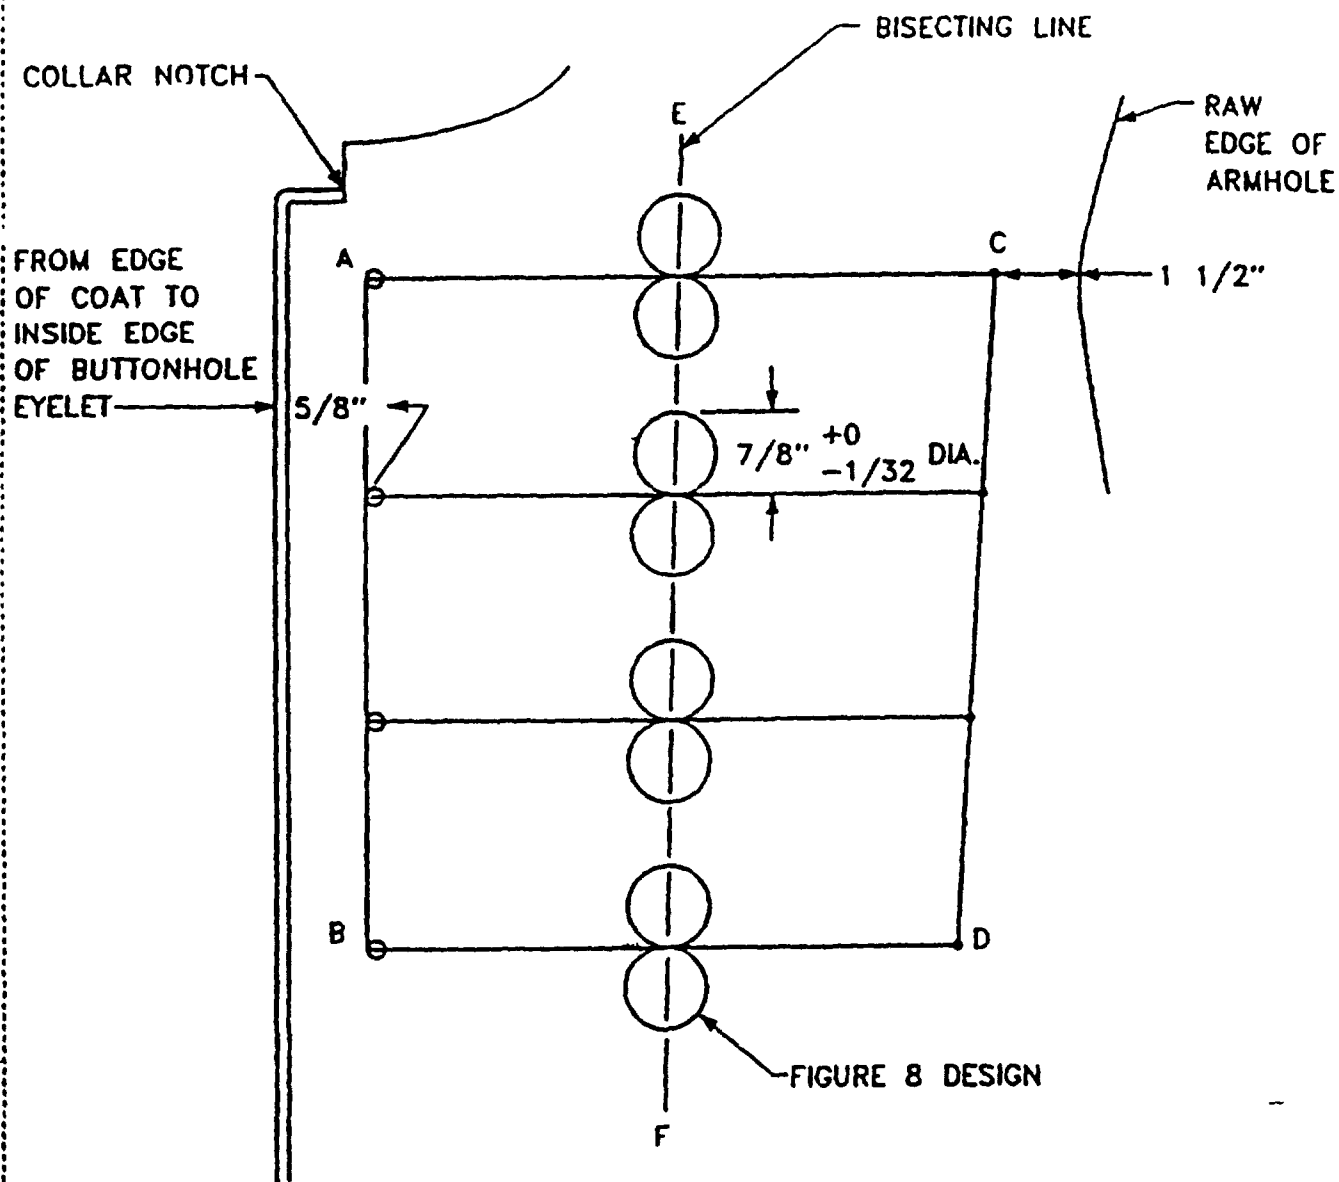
COAT, MAN'S: SCARLET, DRUM AND BUGLE CORPS
